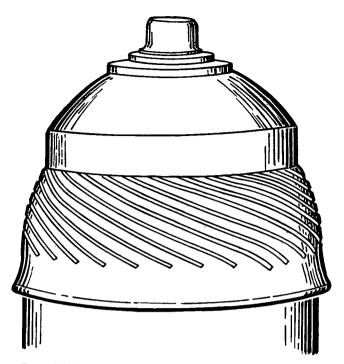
Mask Mounted On Bearing Ready For Sputter Etching
